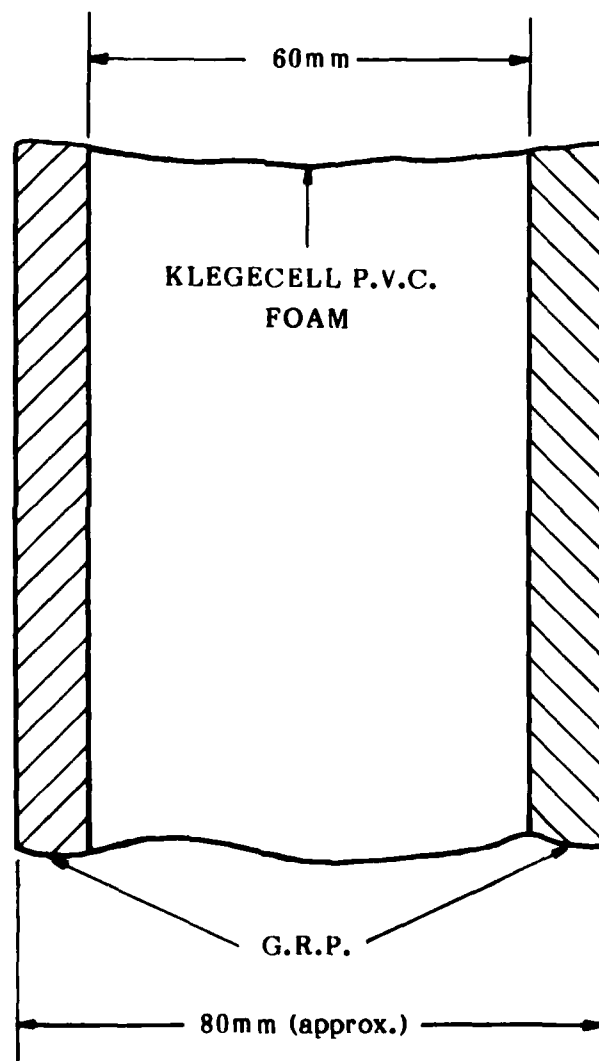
CONSTRUCTION OF GRP-FOAM SANDWICH
